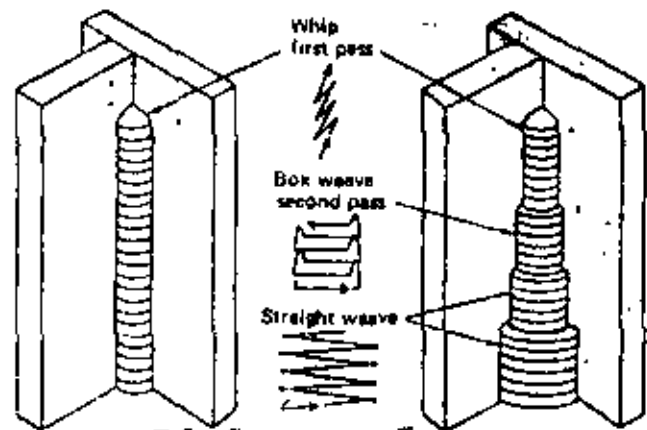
Technique for vertical welding with fast-freeze electrodes.
